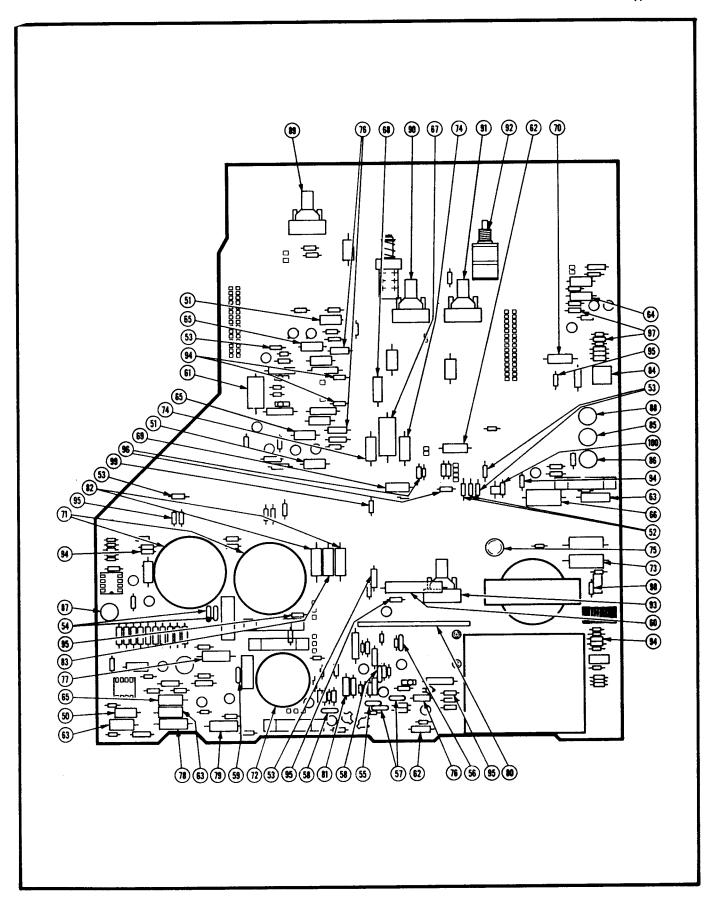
Circuit Board Assembly, Interface (Sheet 2 of 4).
